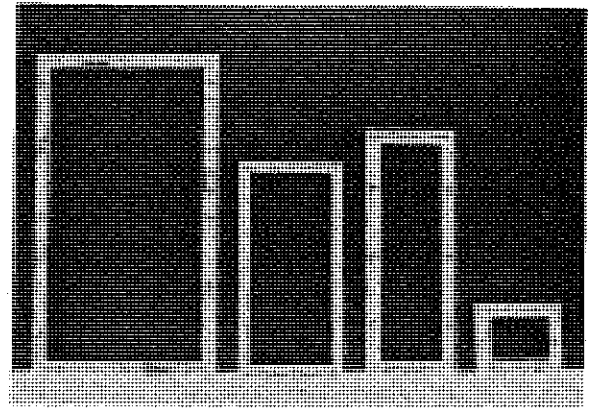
Four mating inserts of fixtures shown in Figs. 8, 9, 10, and 11.
